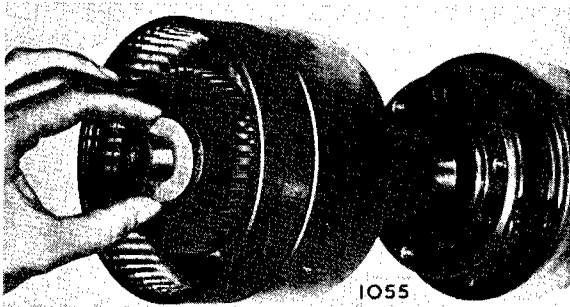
Fitting the front clutch hub thrust washer
